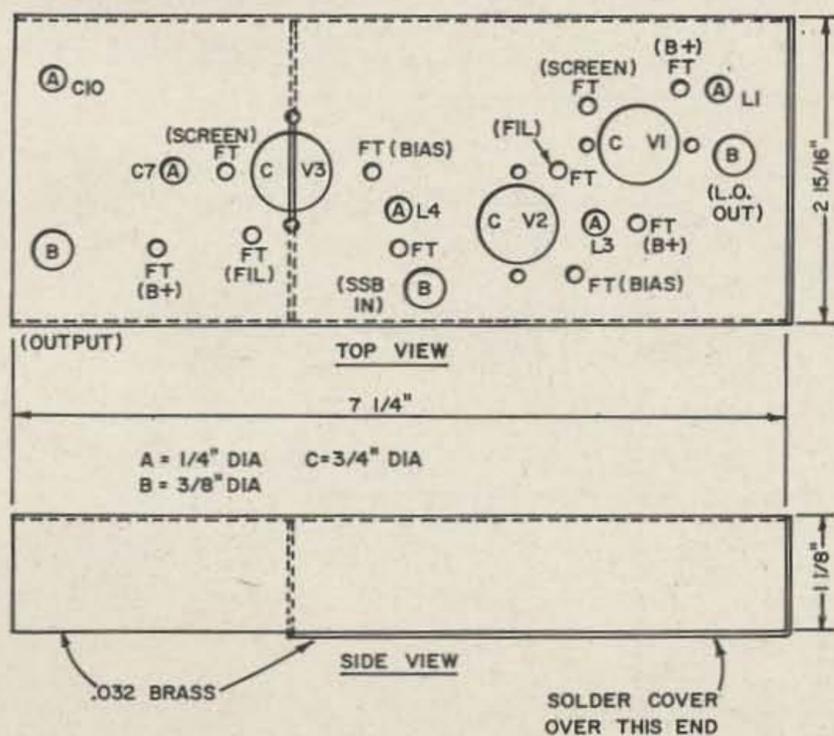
Chassis layout for the six-meter transmitting converter. The "FT" indicates the location of feed-through capacitors.
